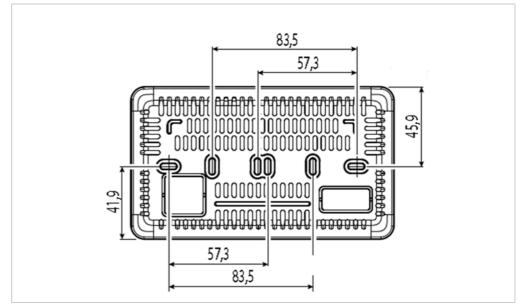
Rear view ISYteq Touch 4.0 OC with drill hole spacing (dimensions in mm)
